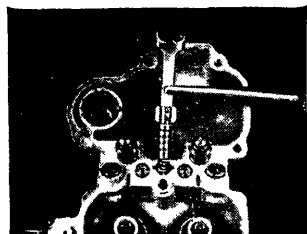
Install vacuum piston spring and vacuum piston and link. If piston is loose on shaft, replace. It is usually advisable to replace vacuum piston spring each time carburetor is serviced
